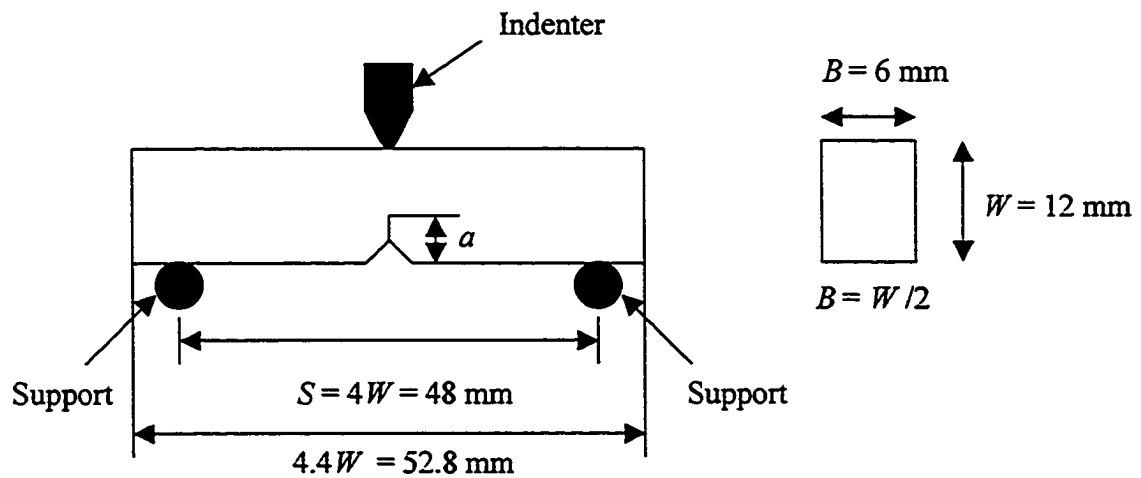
Geometry and dimensions of the specimens for fracture toughness test.
